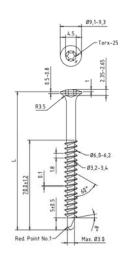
ISO-TAK screw BS61 - Ø 6,1 mm, tempered steel SHE 1022 head
